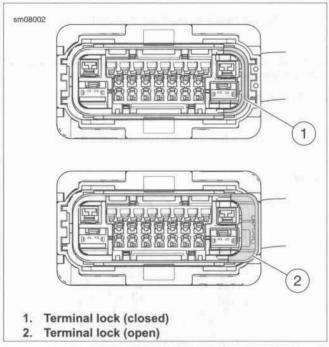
Bosch BTC Sealed Connector Terminal Lock
